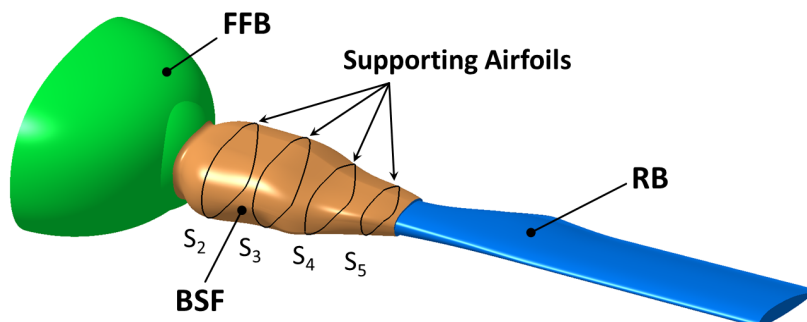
CAD model of the single rotor blade used for the design optimization of the RACER blade-sleeve fairing.
